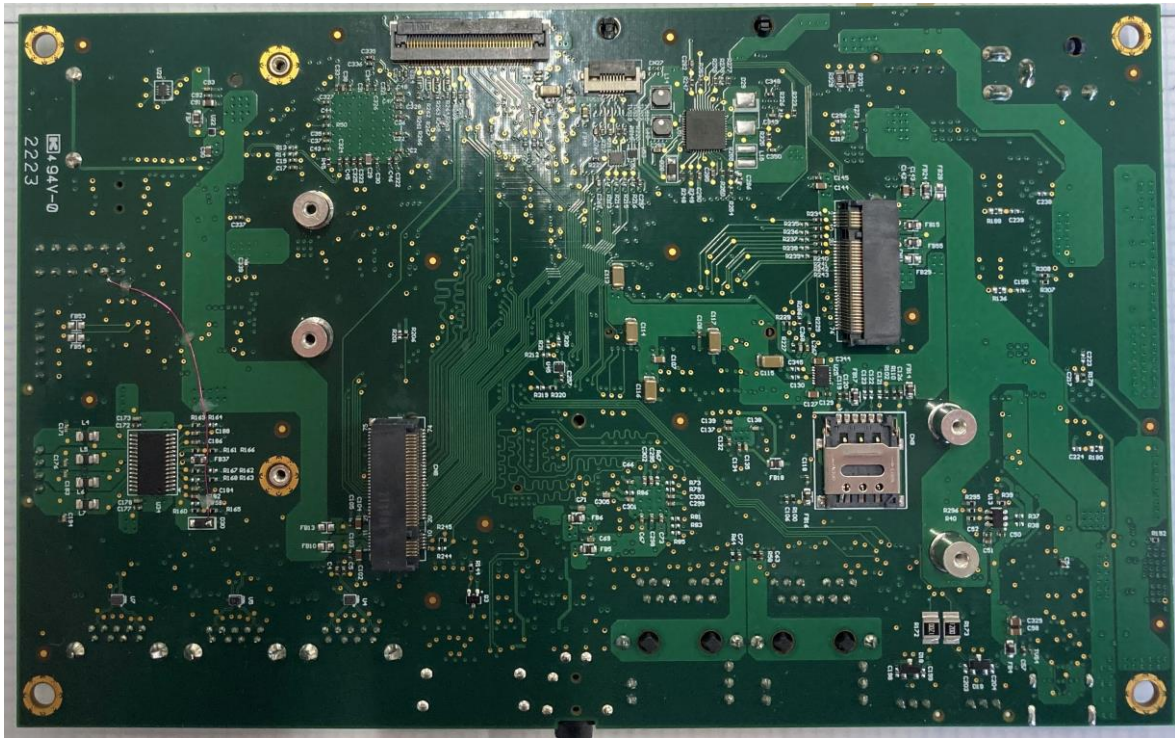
VEST i.MX8M Plus Carrier Board Back Side View
